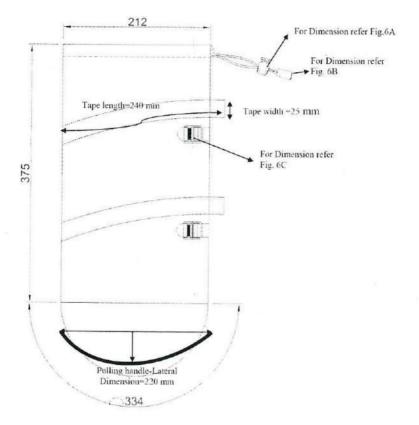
Dimension of a Packing Bag for guidance (All dimensions are in mm)
